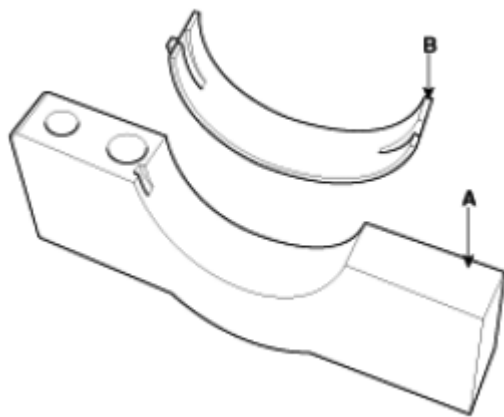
Locating Main Bearing Cap And Lower Bearings
